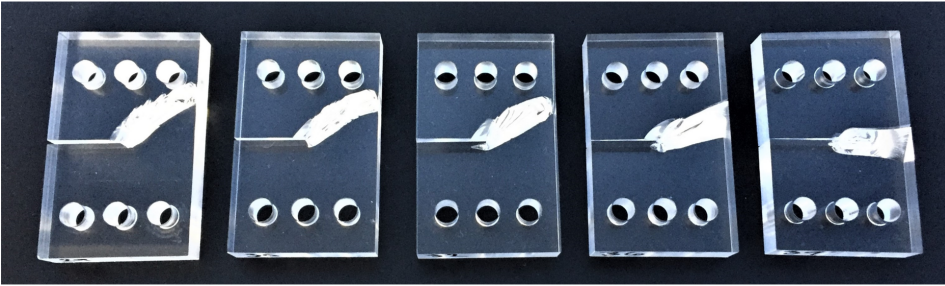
Specimen in plane crack paths for all C-fixture combinations, of J-fixture position  $\beta = 45^\circ$ .
